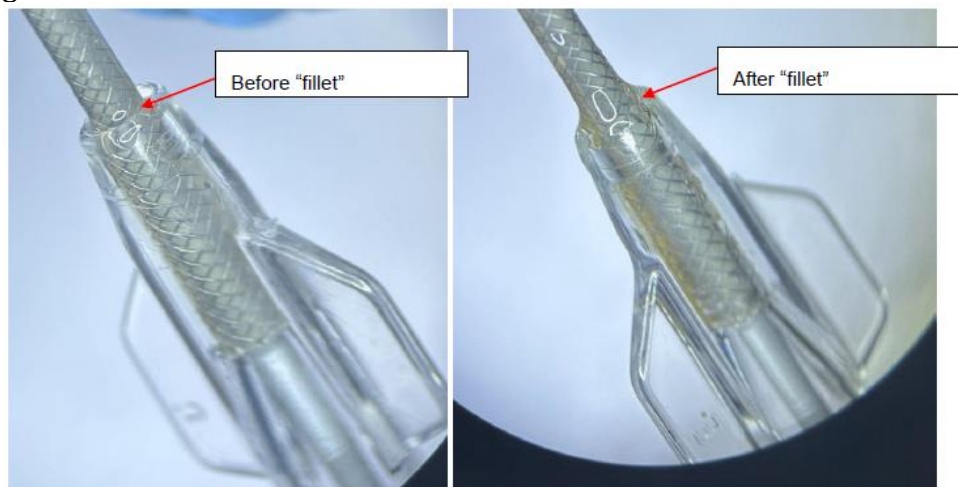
Adding a fillet (it may be advantageous to remove the part from the fixture for this step so that it can be done fully under a microscope)
